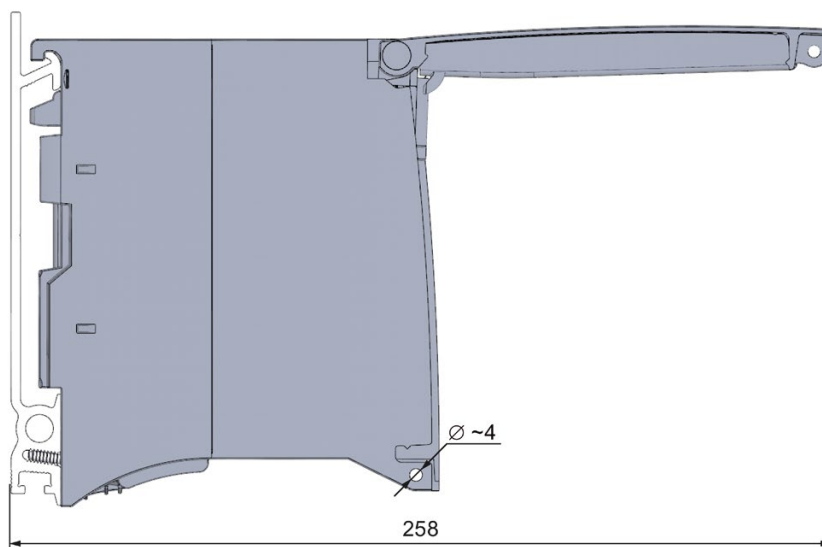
Dimension drawing CPU 1518-4 PN/DP MFP, side view with open front panel
